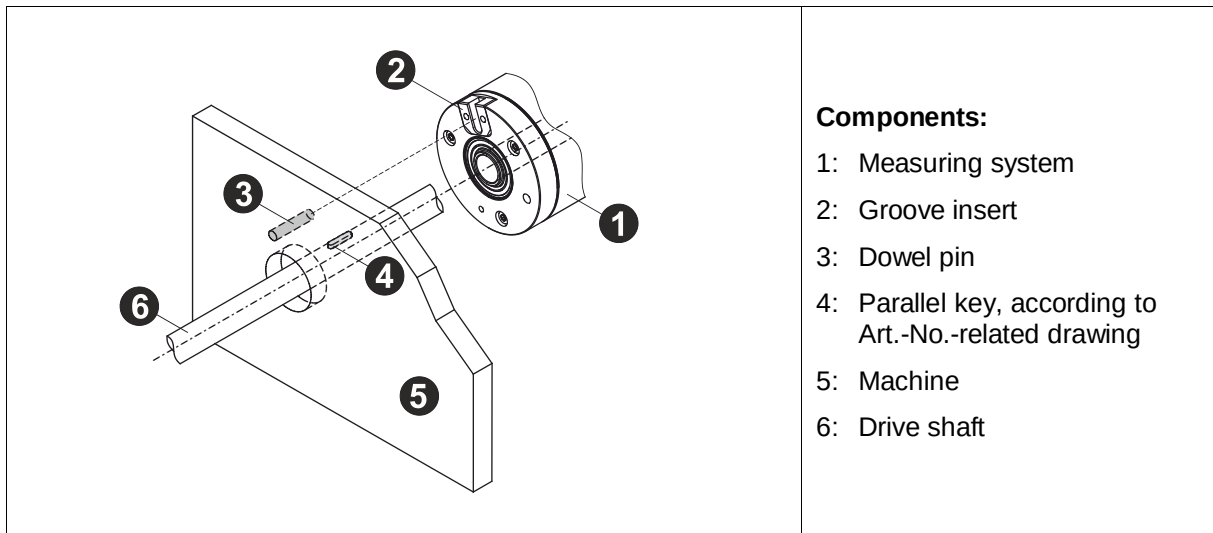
Mounting with dowel pin / groove insert, principle illustration
